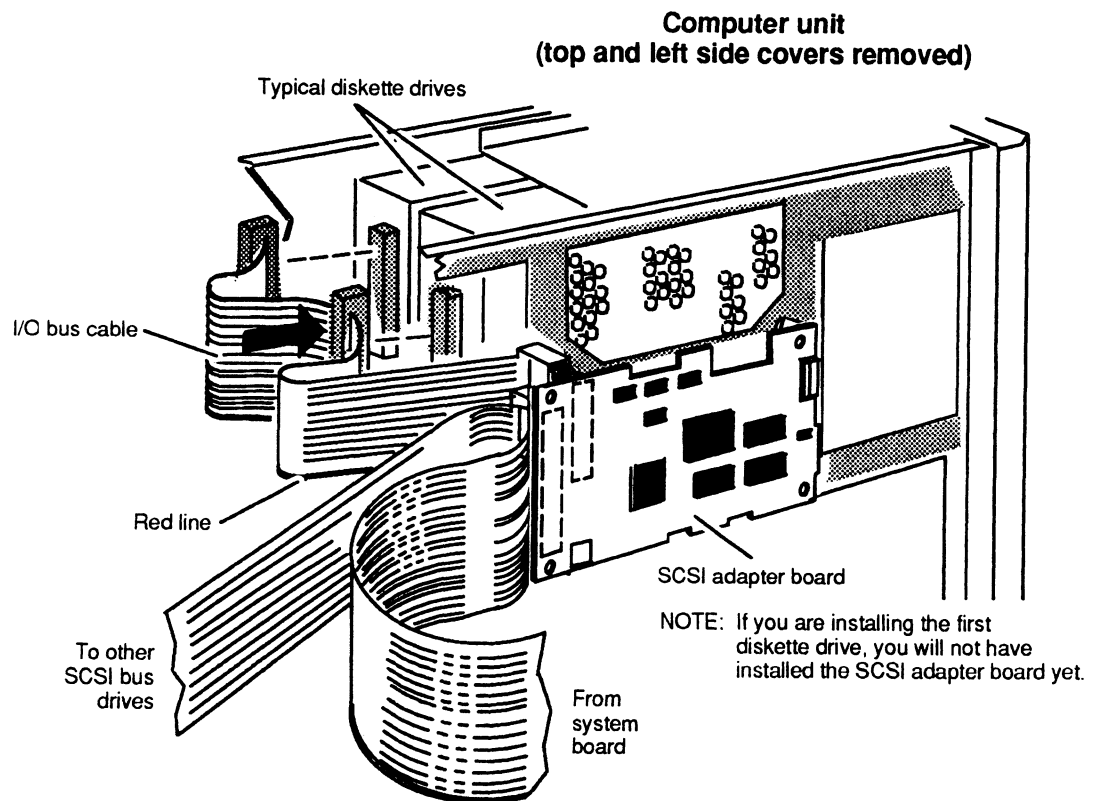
Plugging the I/O Bus Cable into a Diskette Drive
